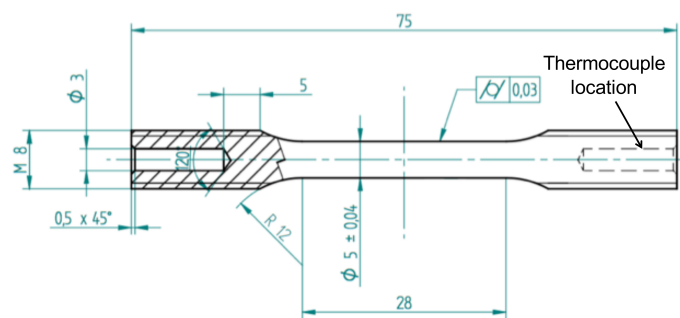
Geometry and dimensions [mm] of tensile specimens.
